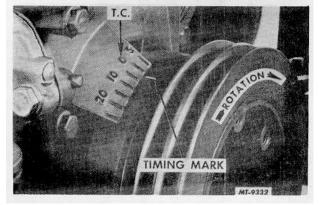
Illustrating Timing Marks on Crank-shaft Pulley Hub and Engine Front Cover
